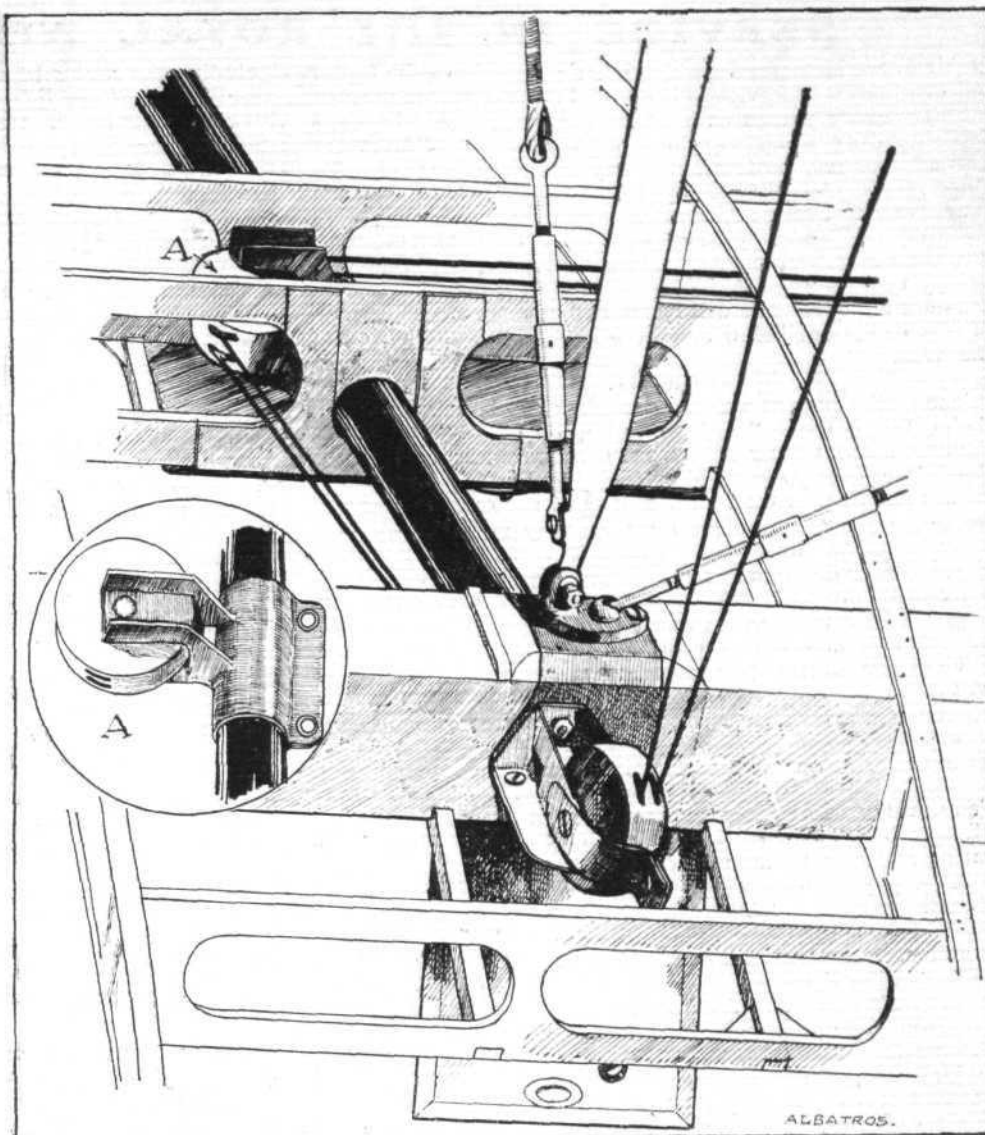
Arrangement of wing flap control cable pulleys in bottom wing of the Albatros. After passing over pulleys on rear spar, the control cables pass through the spar horizontally.
